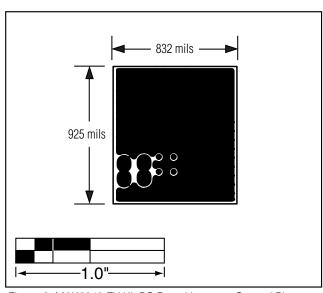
MAX2648 EV Kit PC Board Layout—Ground Plane
